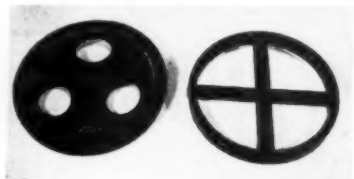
The old flywheel was replaced by welded design (right) which weighs 23% less, but is just as efficient.
